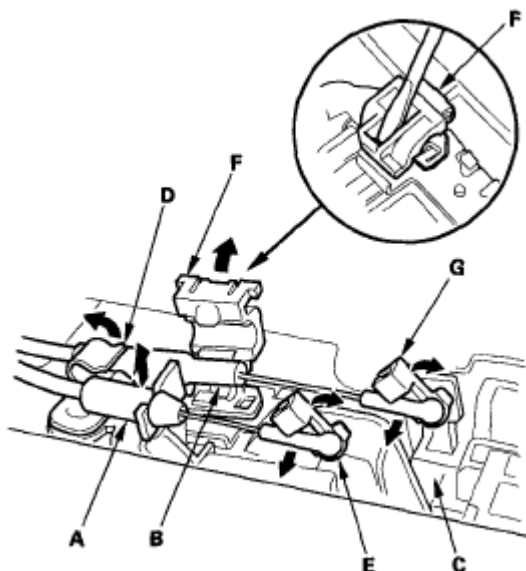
Disconnecting Inner Handle Cable And Latch Cable
